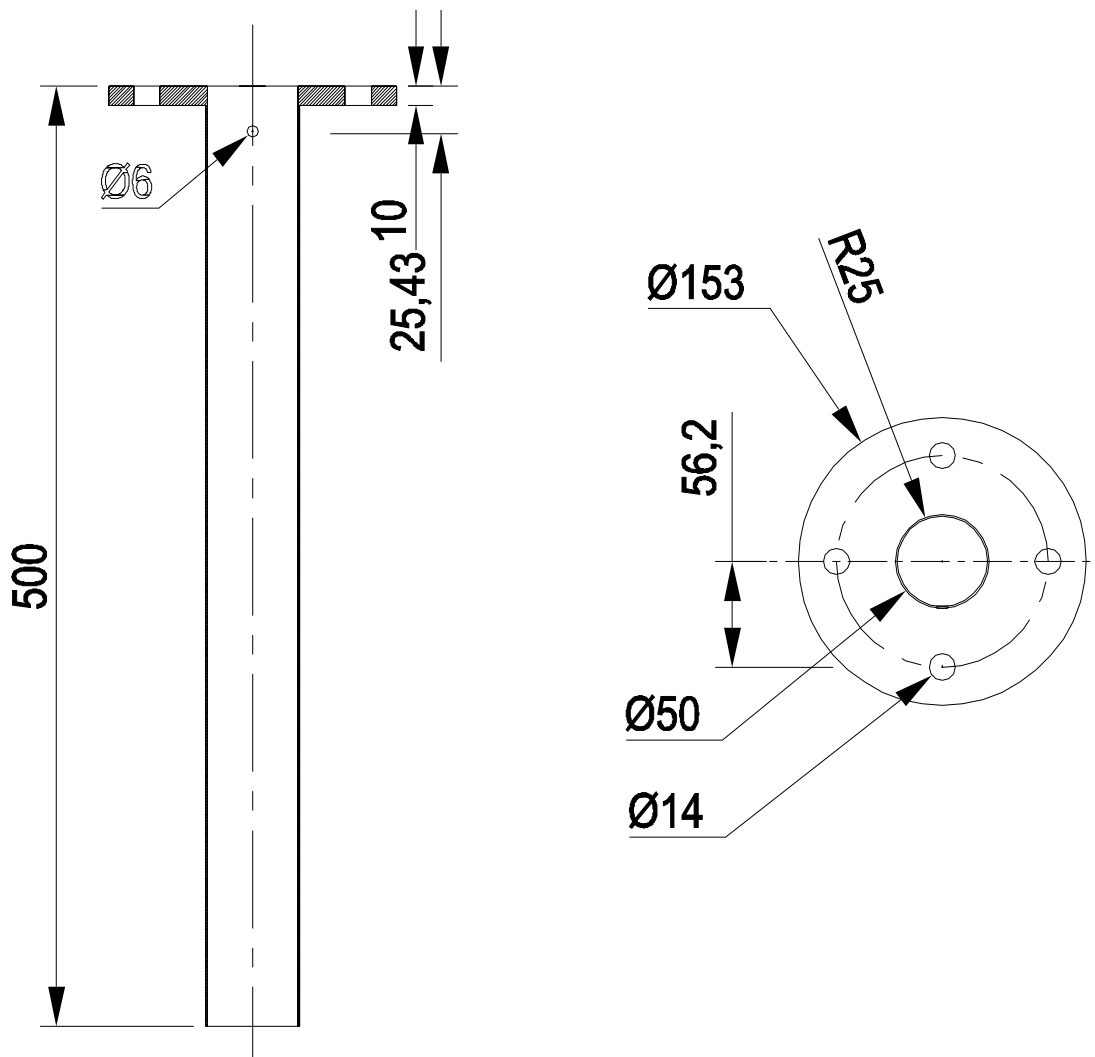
Profile of the secondary flow pipe part 2 with main dimensions, all dimensions in mm.
